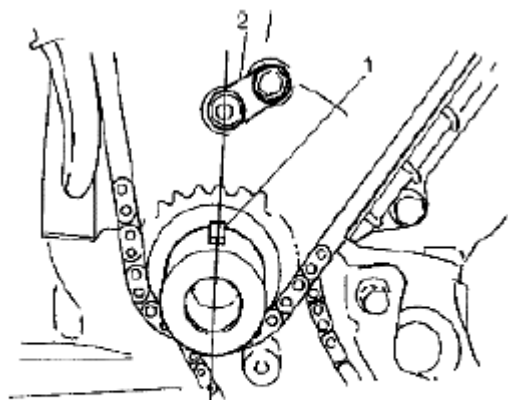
Identifying LH (No. 1) Bank Exhaust Camshaft Sprocket
